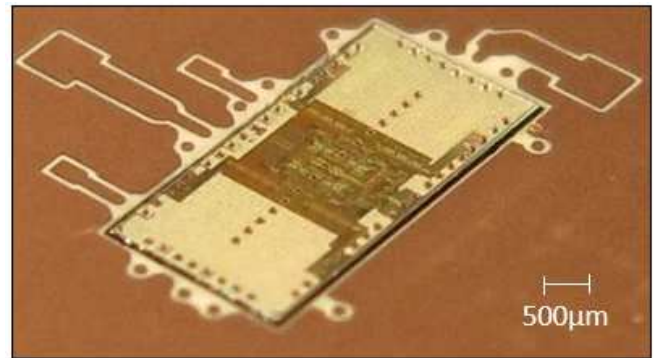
MMIC chip embedded in the centre core of the PCB.
